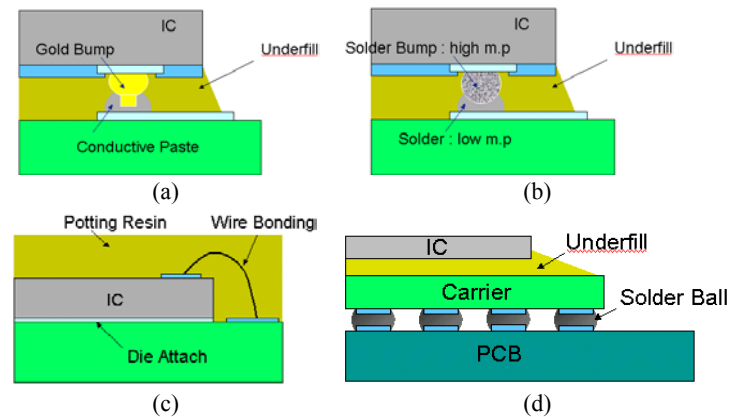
Schematics of chip assembly by (a) Au stud bump with conductive adhesive, (b) solder bump, (c) wire bonding and board assembly by BGA in the CSP.
